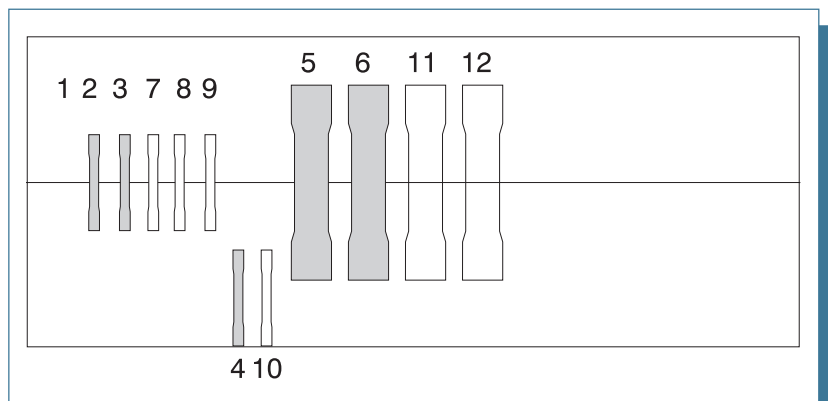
Identification of tensile test samples: small specimens had a gauge length of 25 mm, and a 5x4 mm section; large samples had a 55 mm gauge length and a 20x4 mm section
